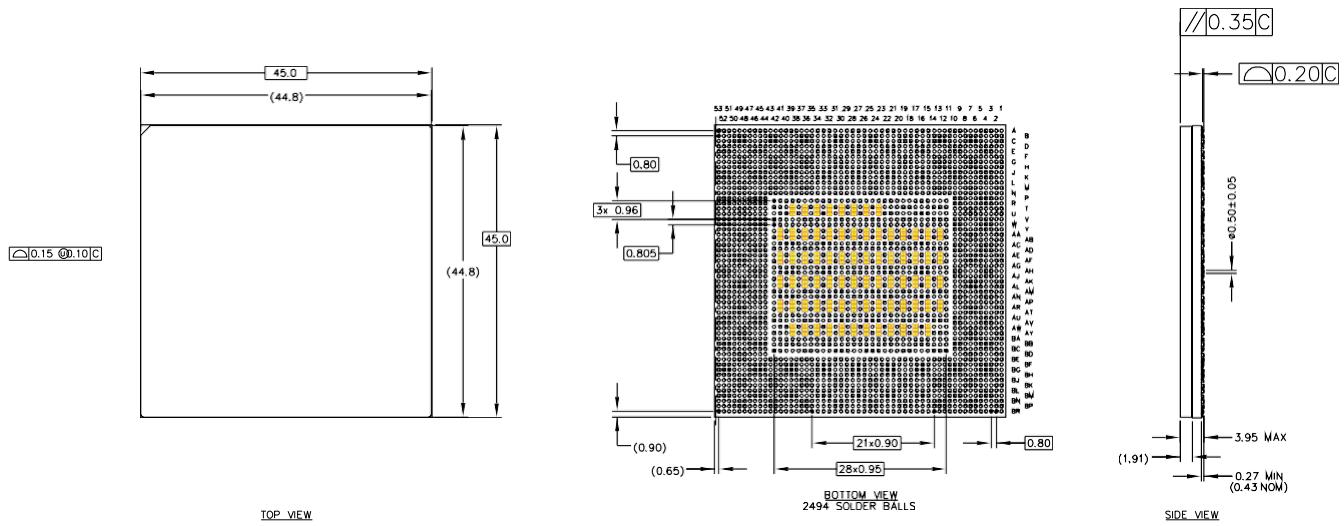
ET-SoC-1 Package Outline and Dimensions
